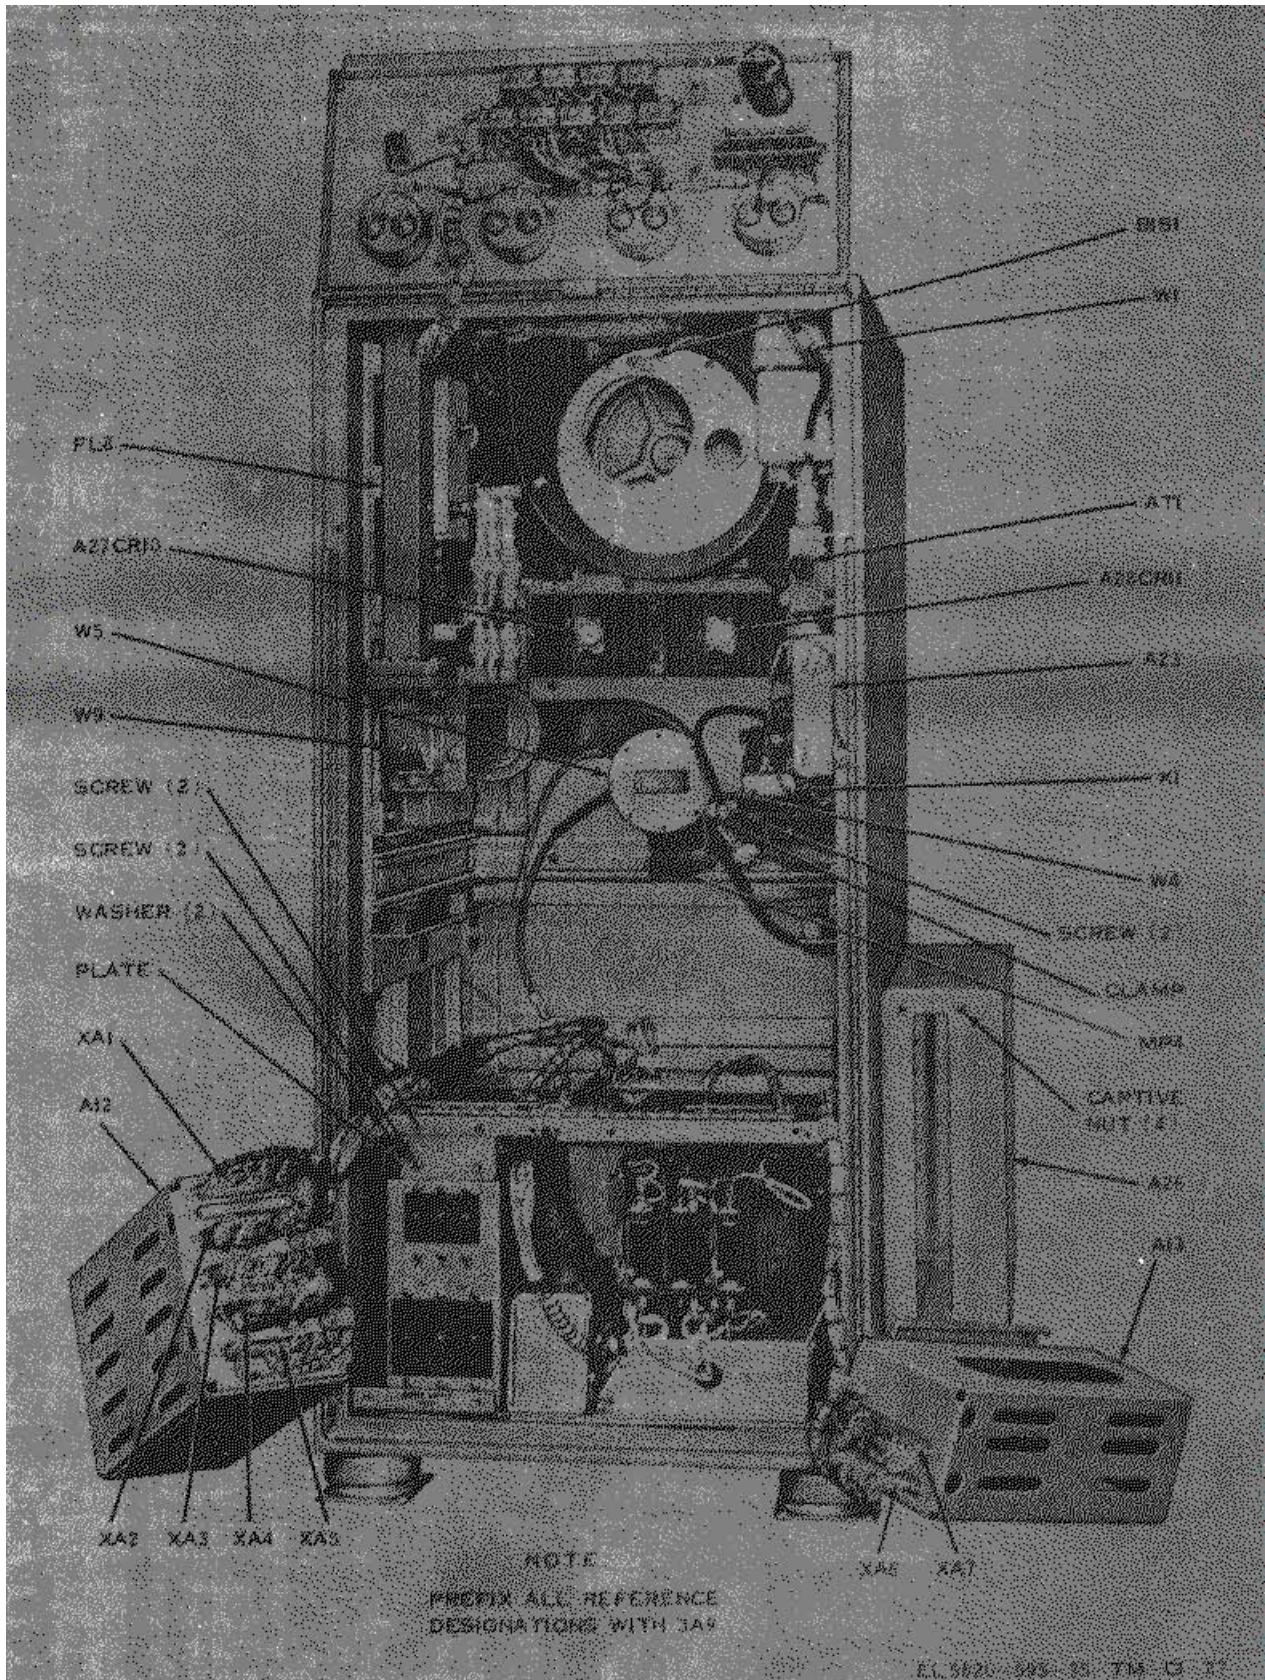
Power amplifier cabinet 3A9, front view, partially disassembled, parts location.
